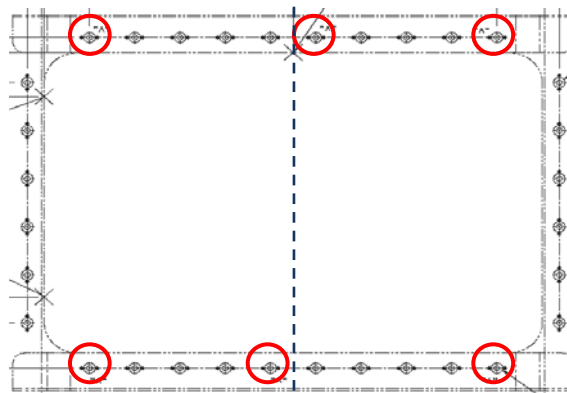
OGS Upper Right Side Access Panel Fastener Minimum Config
